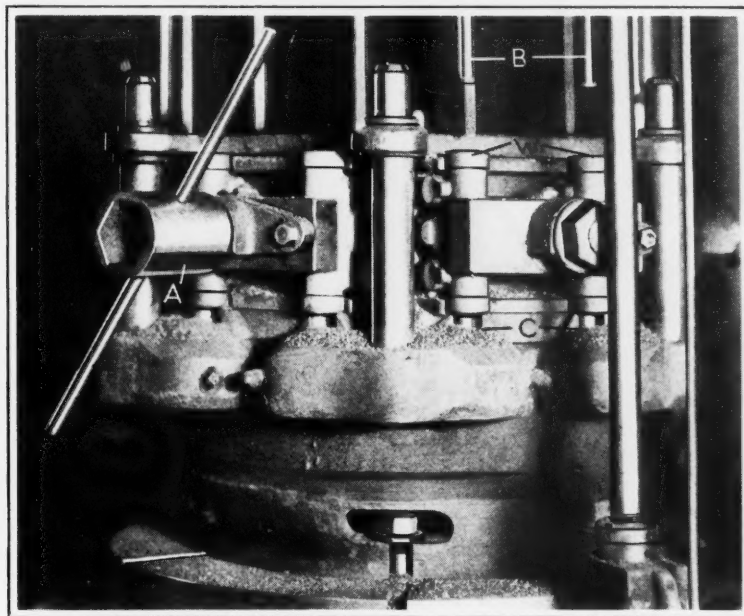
Indexing Fixture Designed for Vertical Boring on Multiple-spindle Machine Equipped with Tungsten-carbide Tools
